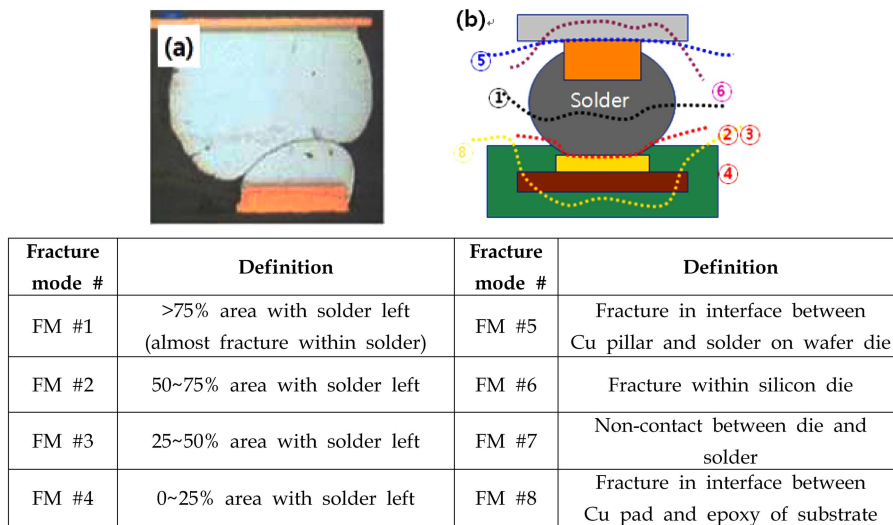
Failure modes of solder joints^{3,21}: (a) Head in pillow, (b) schematic and the 8 types fracture modes for solder joints.
